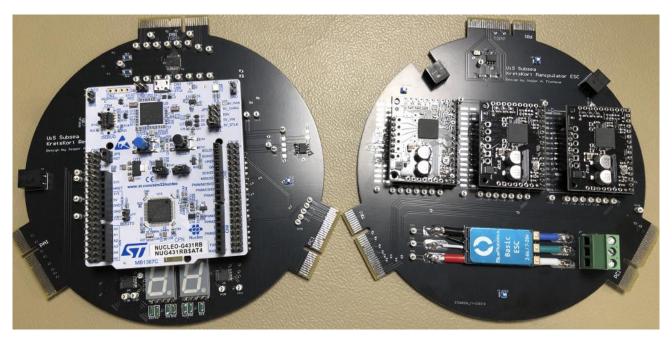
Shows the two PCBs for the control system. The PCBs have the STM32 development board and the stepper motor controller, respectively, mounted to the headers on the PCBs.
